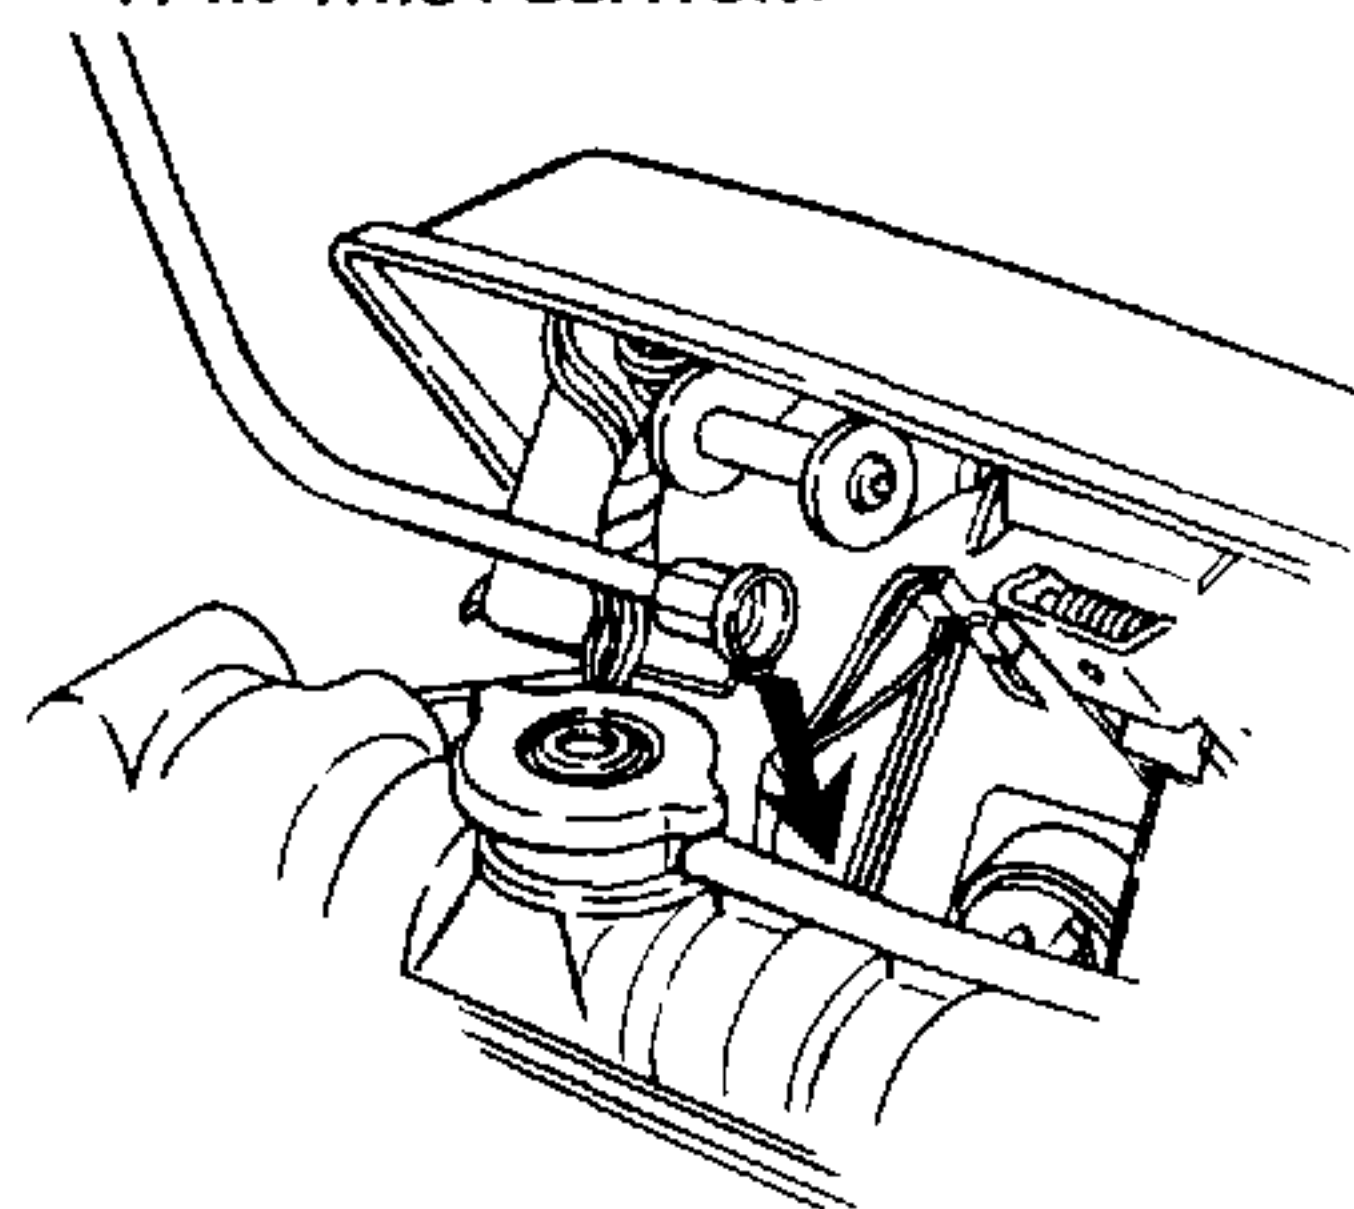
Placement of Front Outlet Tube (Models 1782 and 2182 Only).
